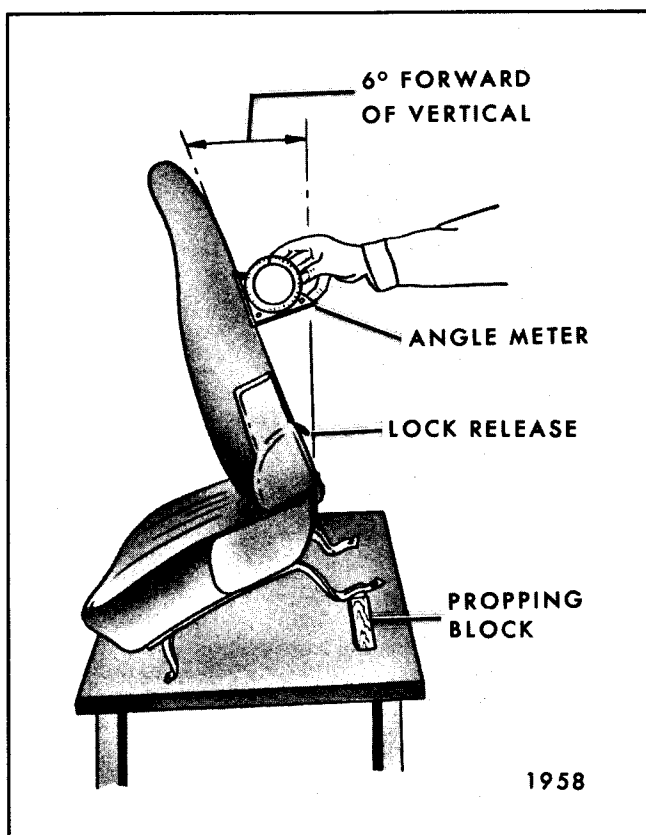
Front Seat Back Inertia Lock Check, Out of Vehicle
